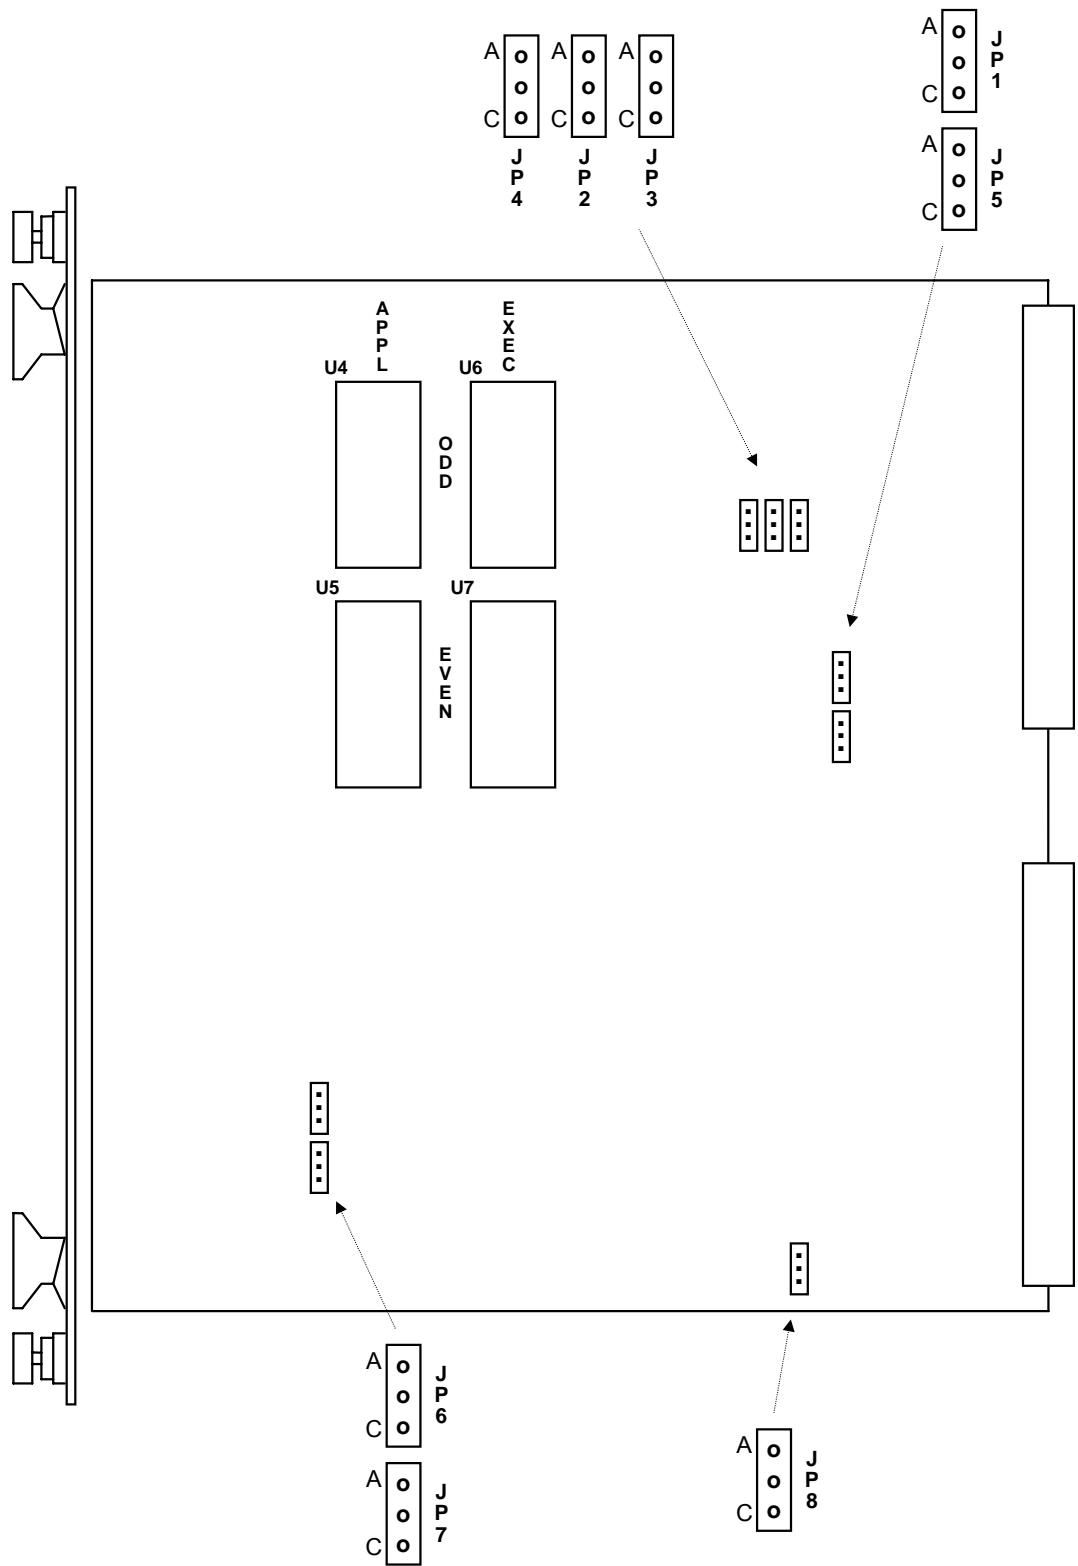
Code System PCB EPROM Installation and Jumper Positions
